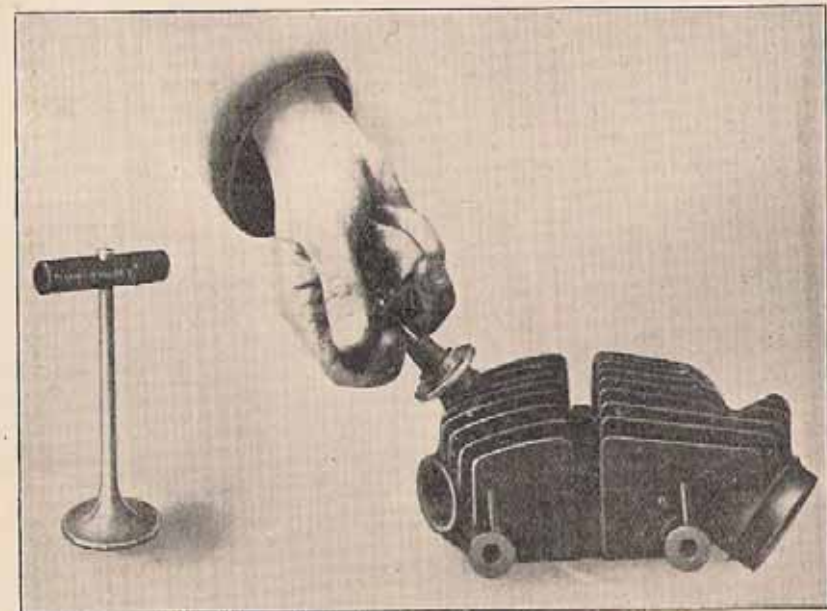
THE A.J.S. VALVE GRINDING TOOL
